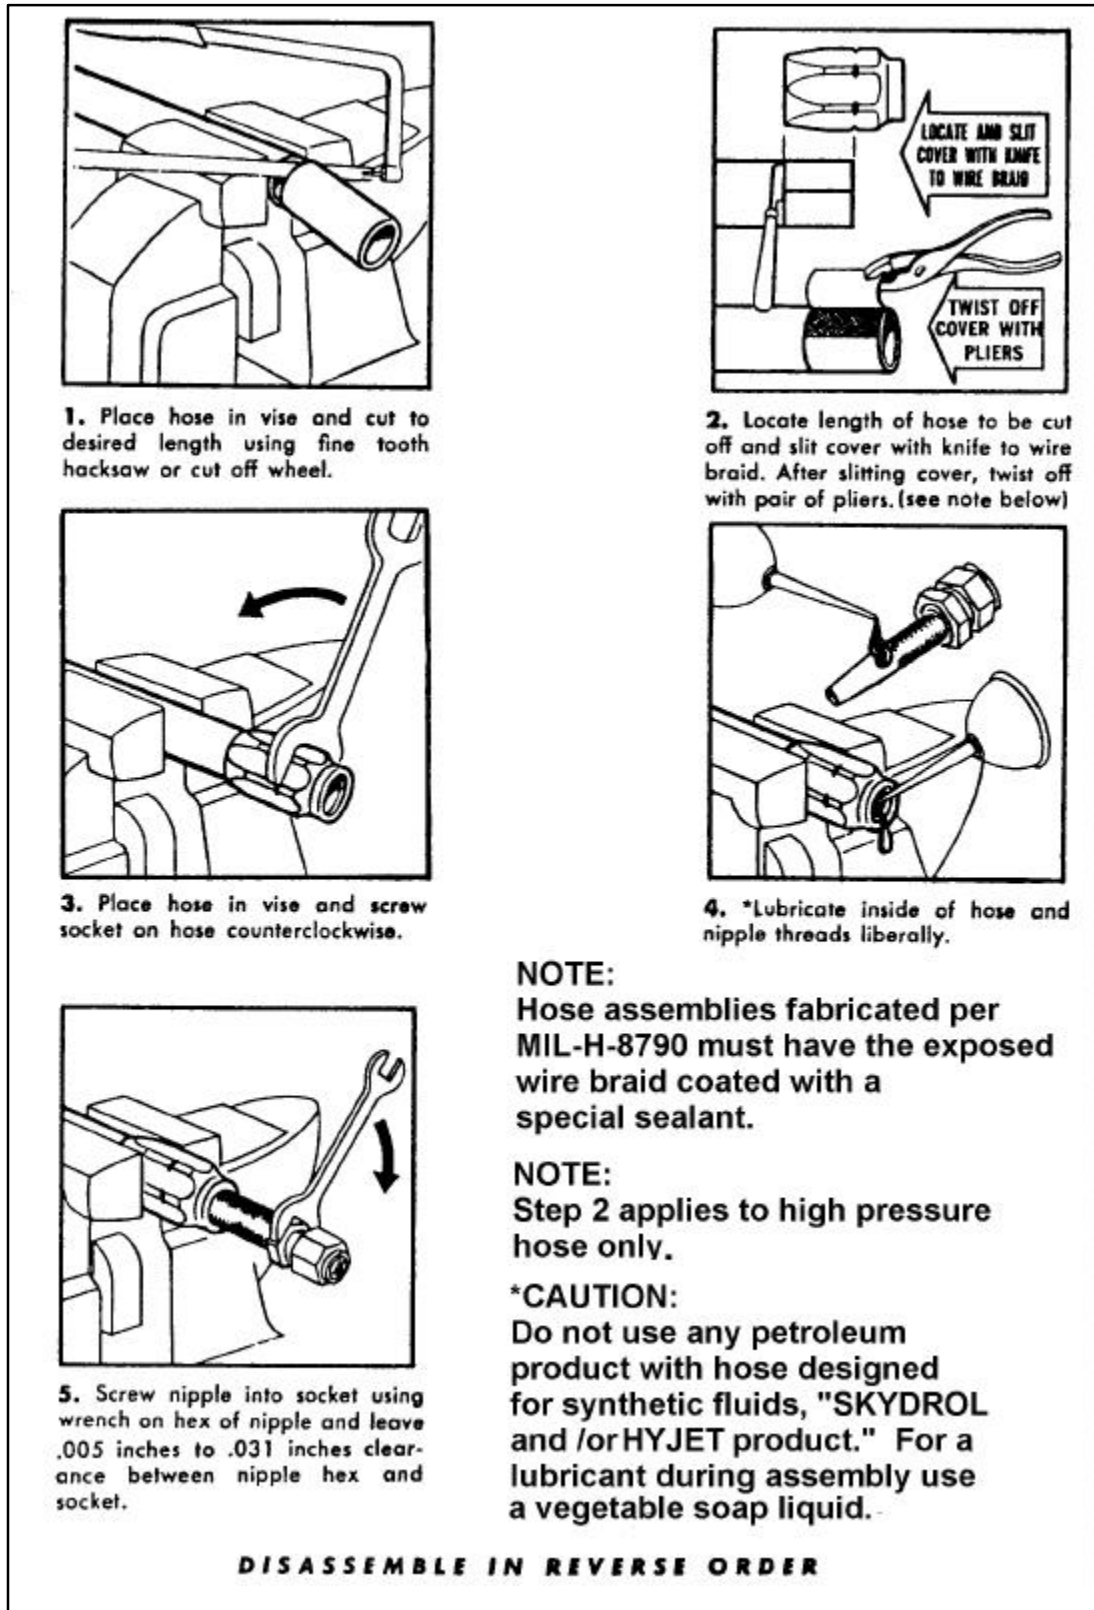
Hose assembly instructions (can be used for low pressure hydraulic fluid, and oil line applications).
